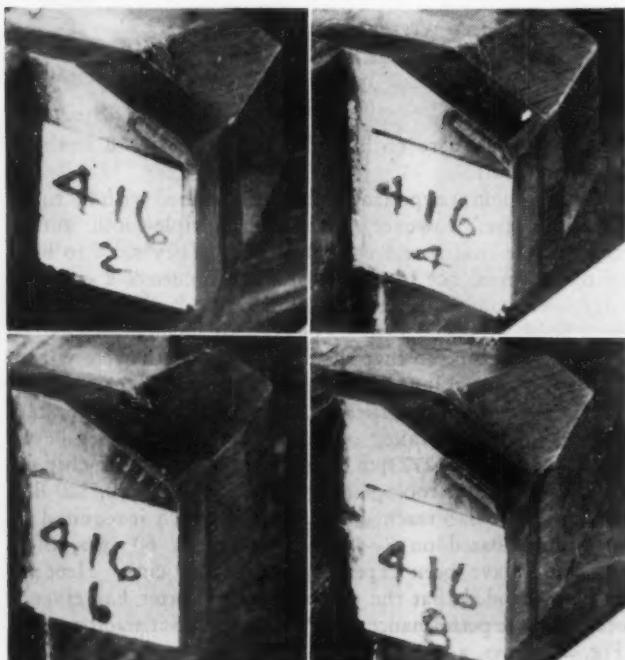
TOOLS FROM FOUR-TOOTH CUTTER
